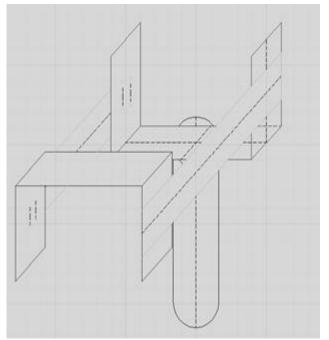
Rough AutoCAD mechanical draft of the handheld camera stabilizer frame, showcasing the camera and rear U-channels and handle.
